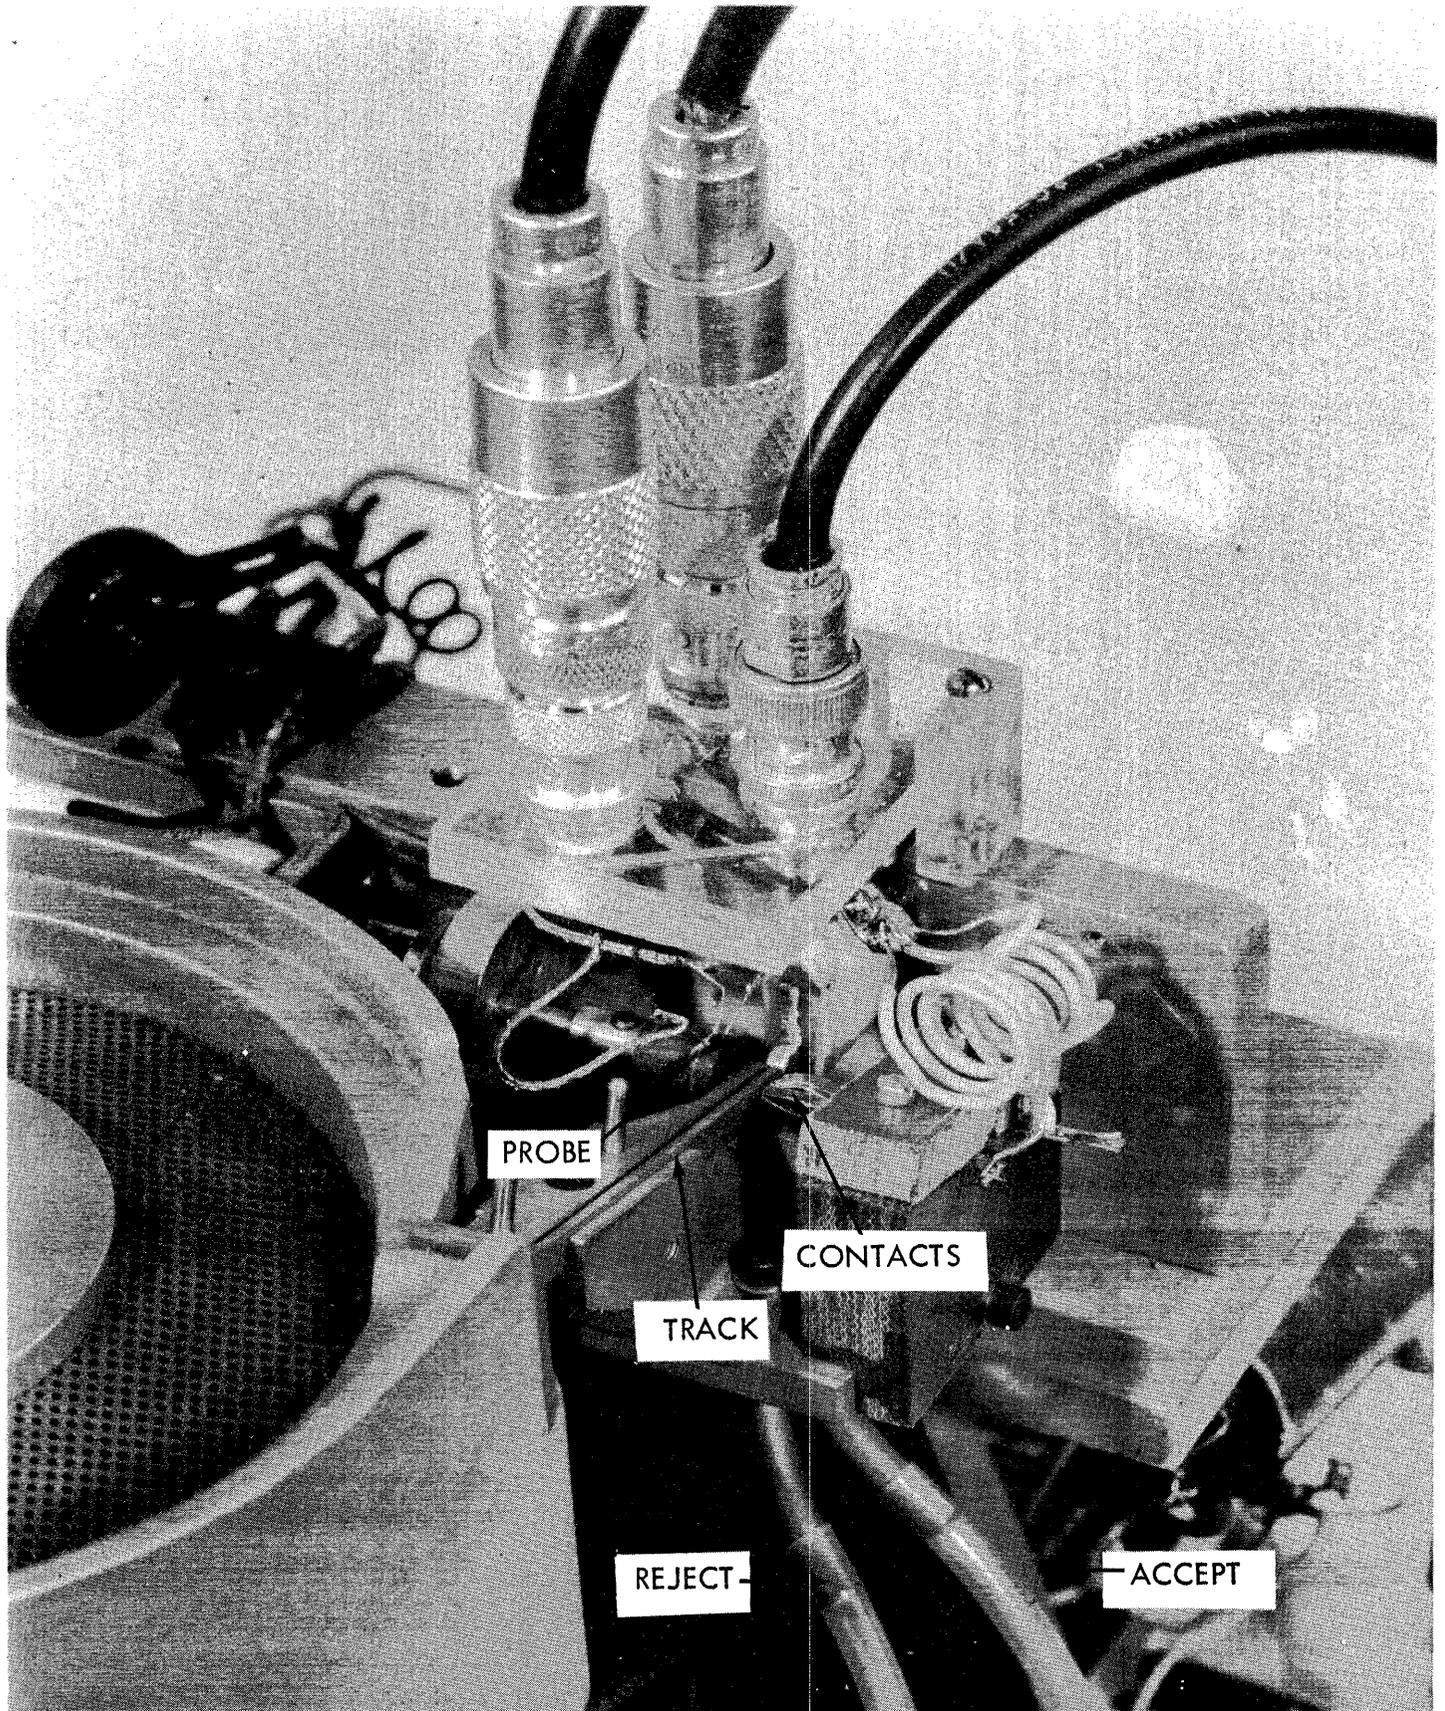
3-HOLE PROBE AND CONTACT ASSEMBLY
